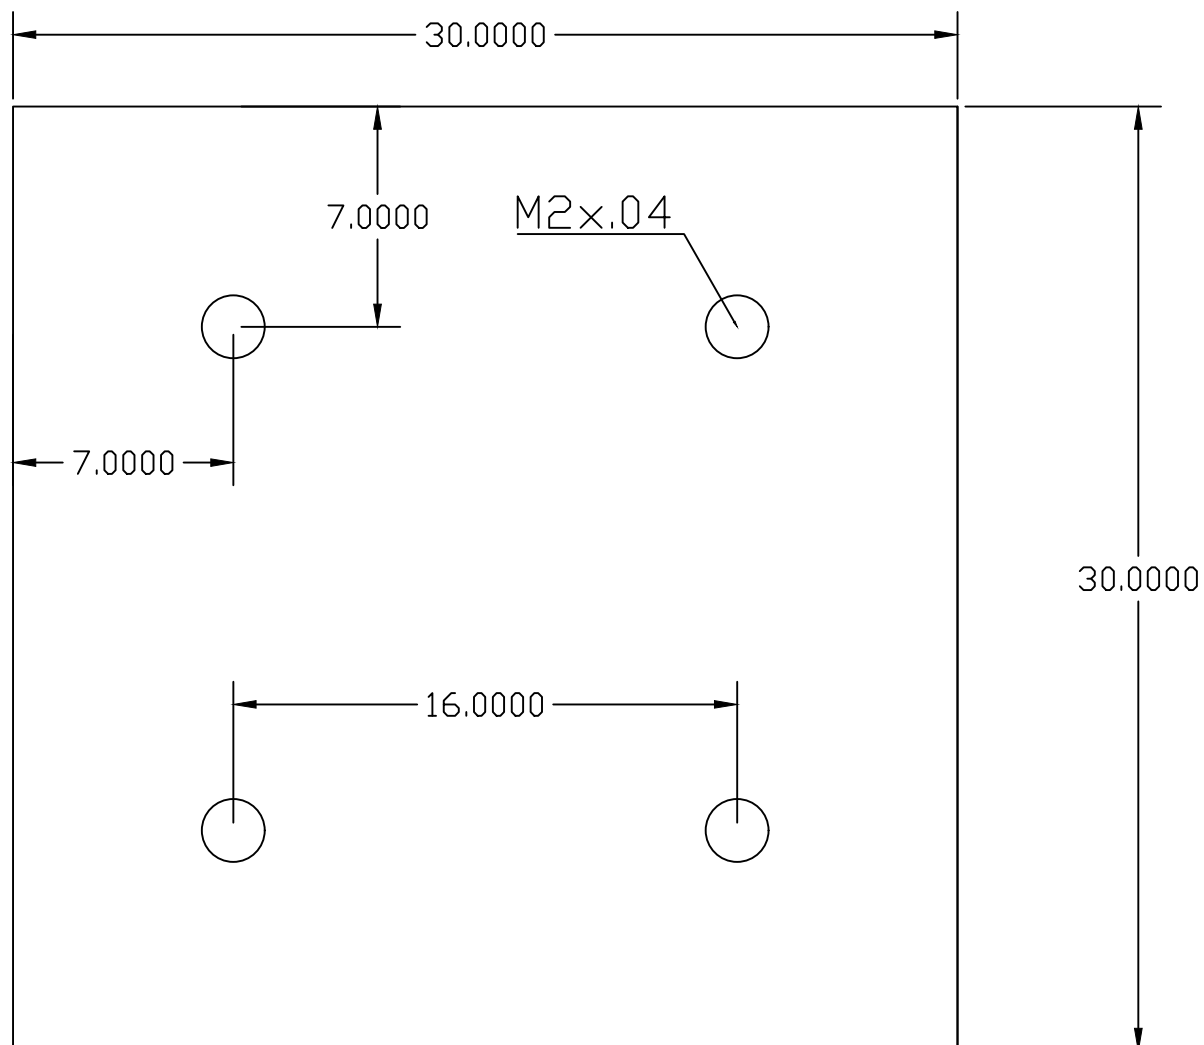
Parasitic quartz surface drawing with dimensions in mm
